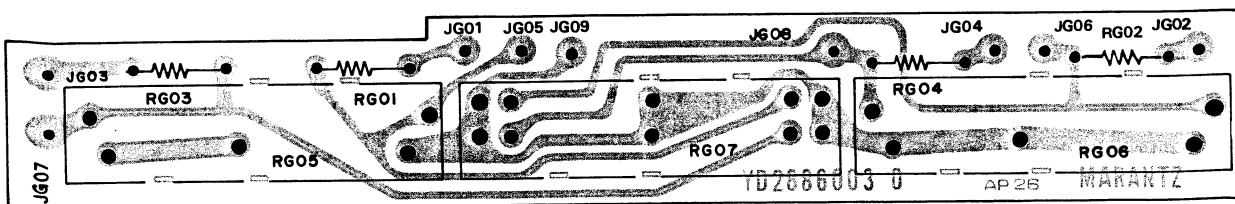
Balance Control Unit Assembly PG01 Component Locations
